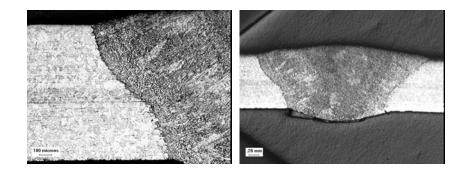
Repair Weld with 308 Stainless Steel Filler Material
